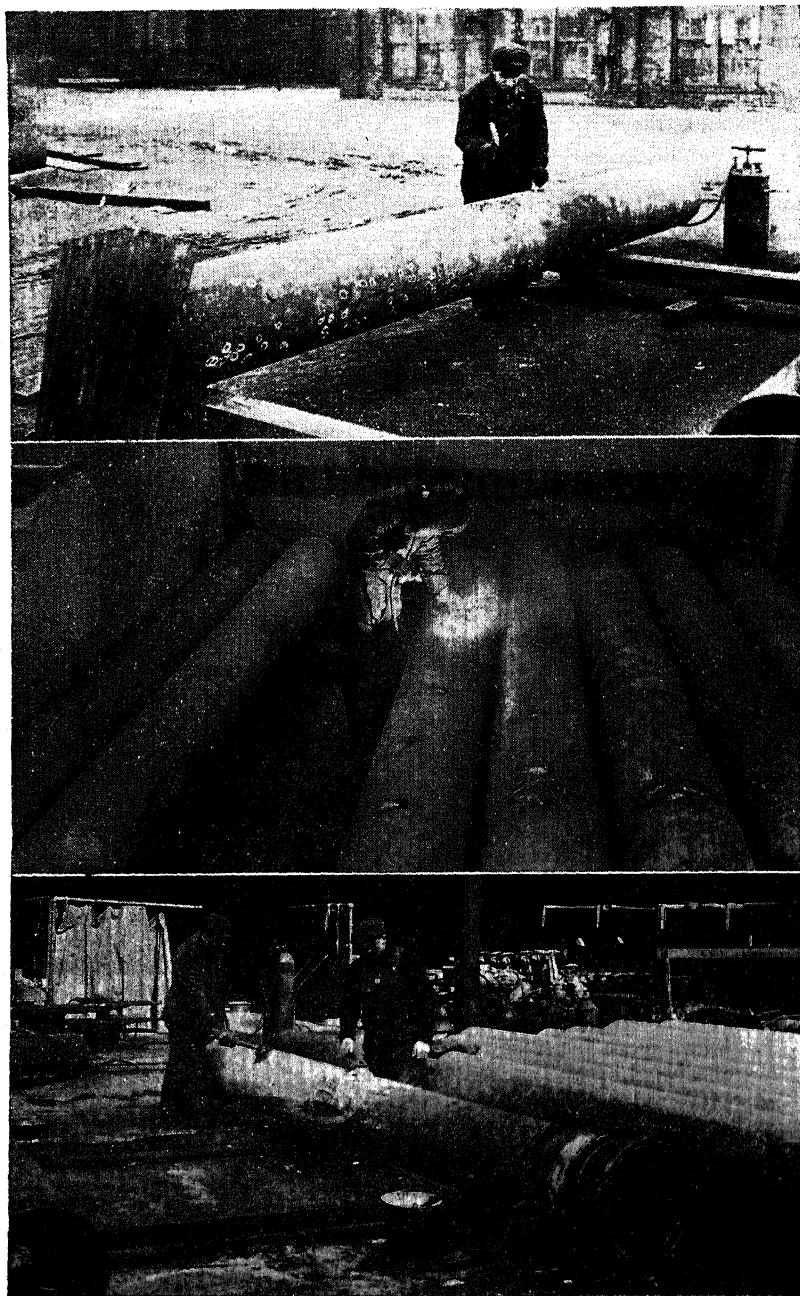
Reconditioning gas line pipe. Top view shows the chipping out of pin holes and marking with chalk. Center view shows operator filling in the pits with weld metal. Bottom view shows the reconditioned pipe being tested under pressure with soap suds.
